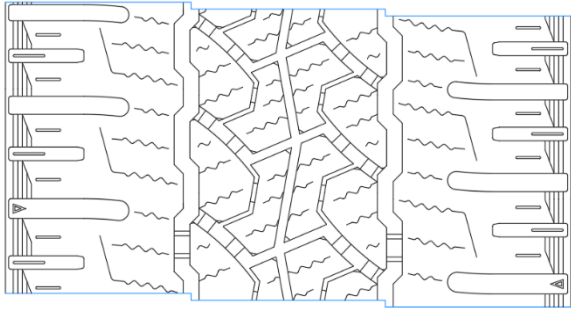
Drawing of tire tread pattern in the AutoCAD environment
